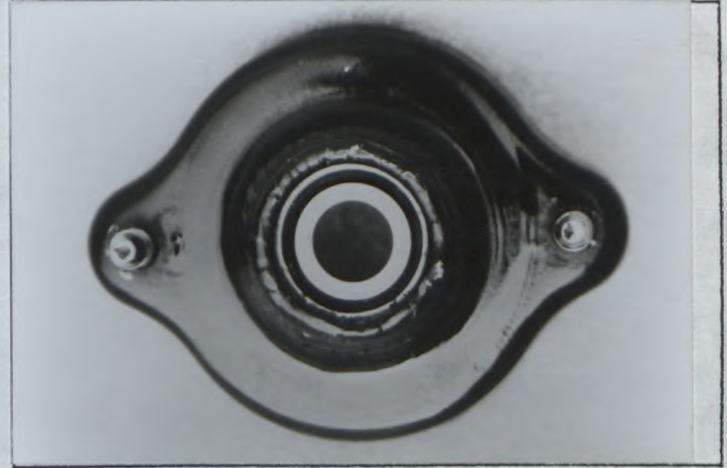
Heavy Duty Rear Top Mount (Damper), type 2
